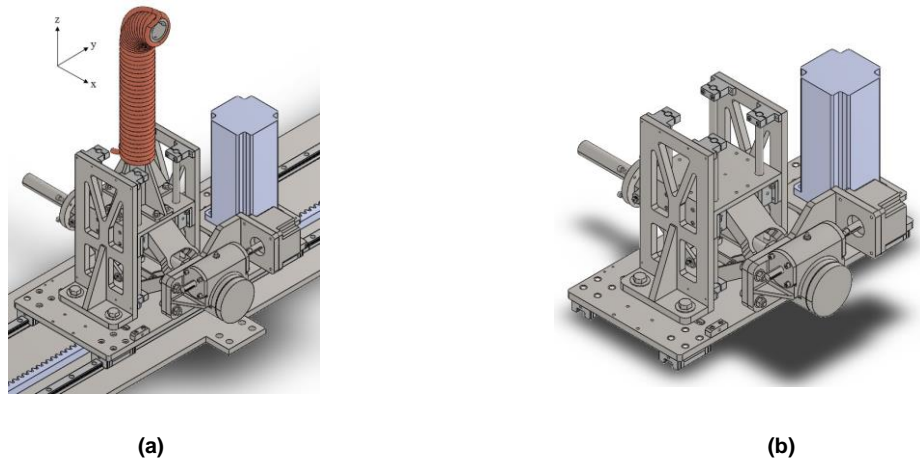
CAD assemblies of (a) complete platform with Mach 6 arm mounted, (b) carriage subassembly.
